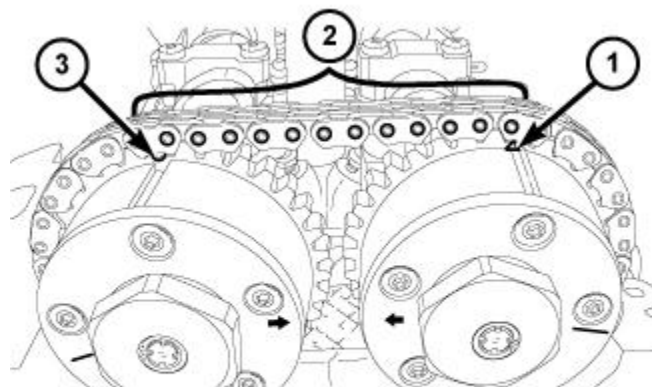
Chain Pins, Arrows, Scribe Lines, Cam Phaser Triangle Marking & Circle Marking
